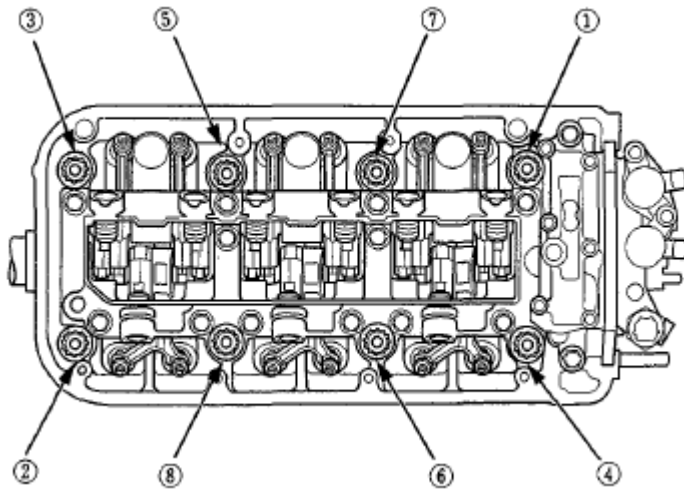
Identifying Rear Cylinder Head Cover Bolt Tightening Sequence
